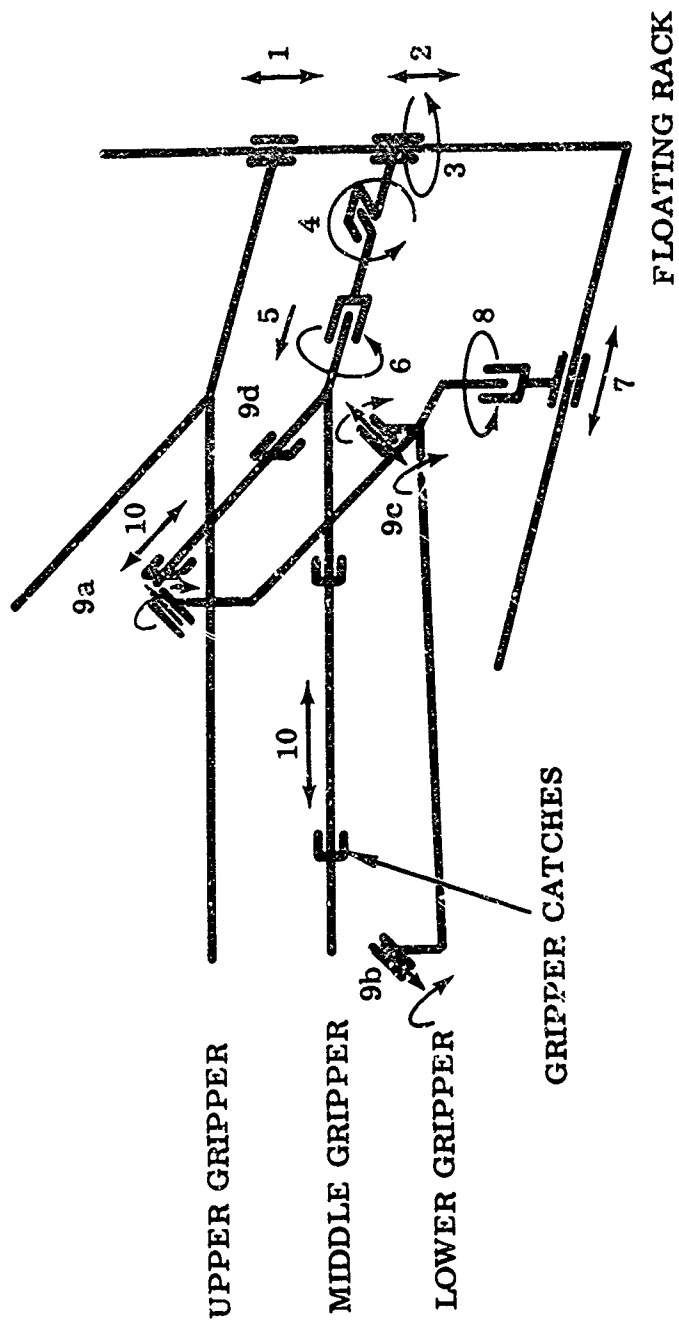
Assembly Equipment Mechanism Functions - Schematic
